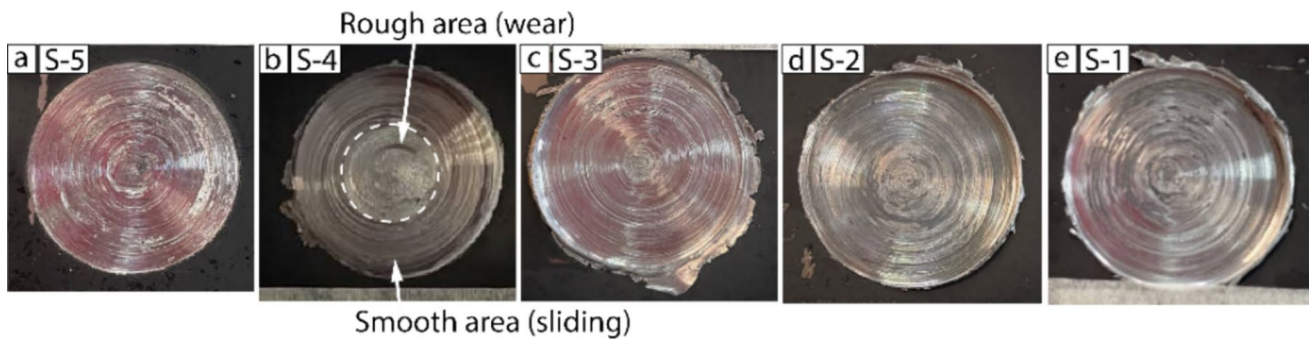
Spot welded surface of samples: S-5 (a), S-4 (b), S-3 (c), S-2 (d), and S-1 (e)
